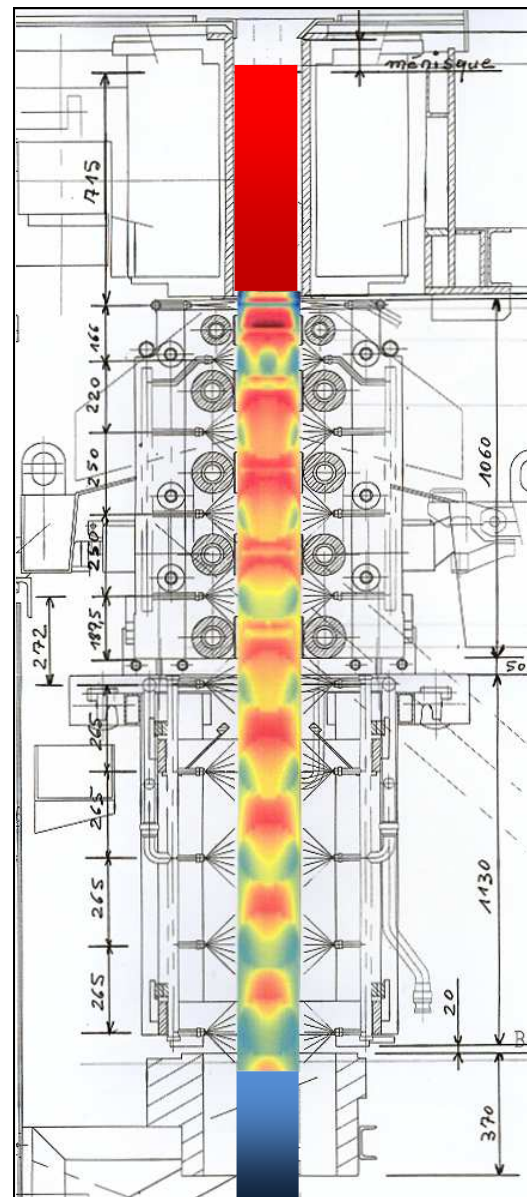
Ugitech's concast machine drawing, showing the upper 4 m : mould and secondary cooling
